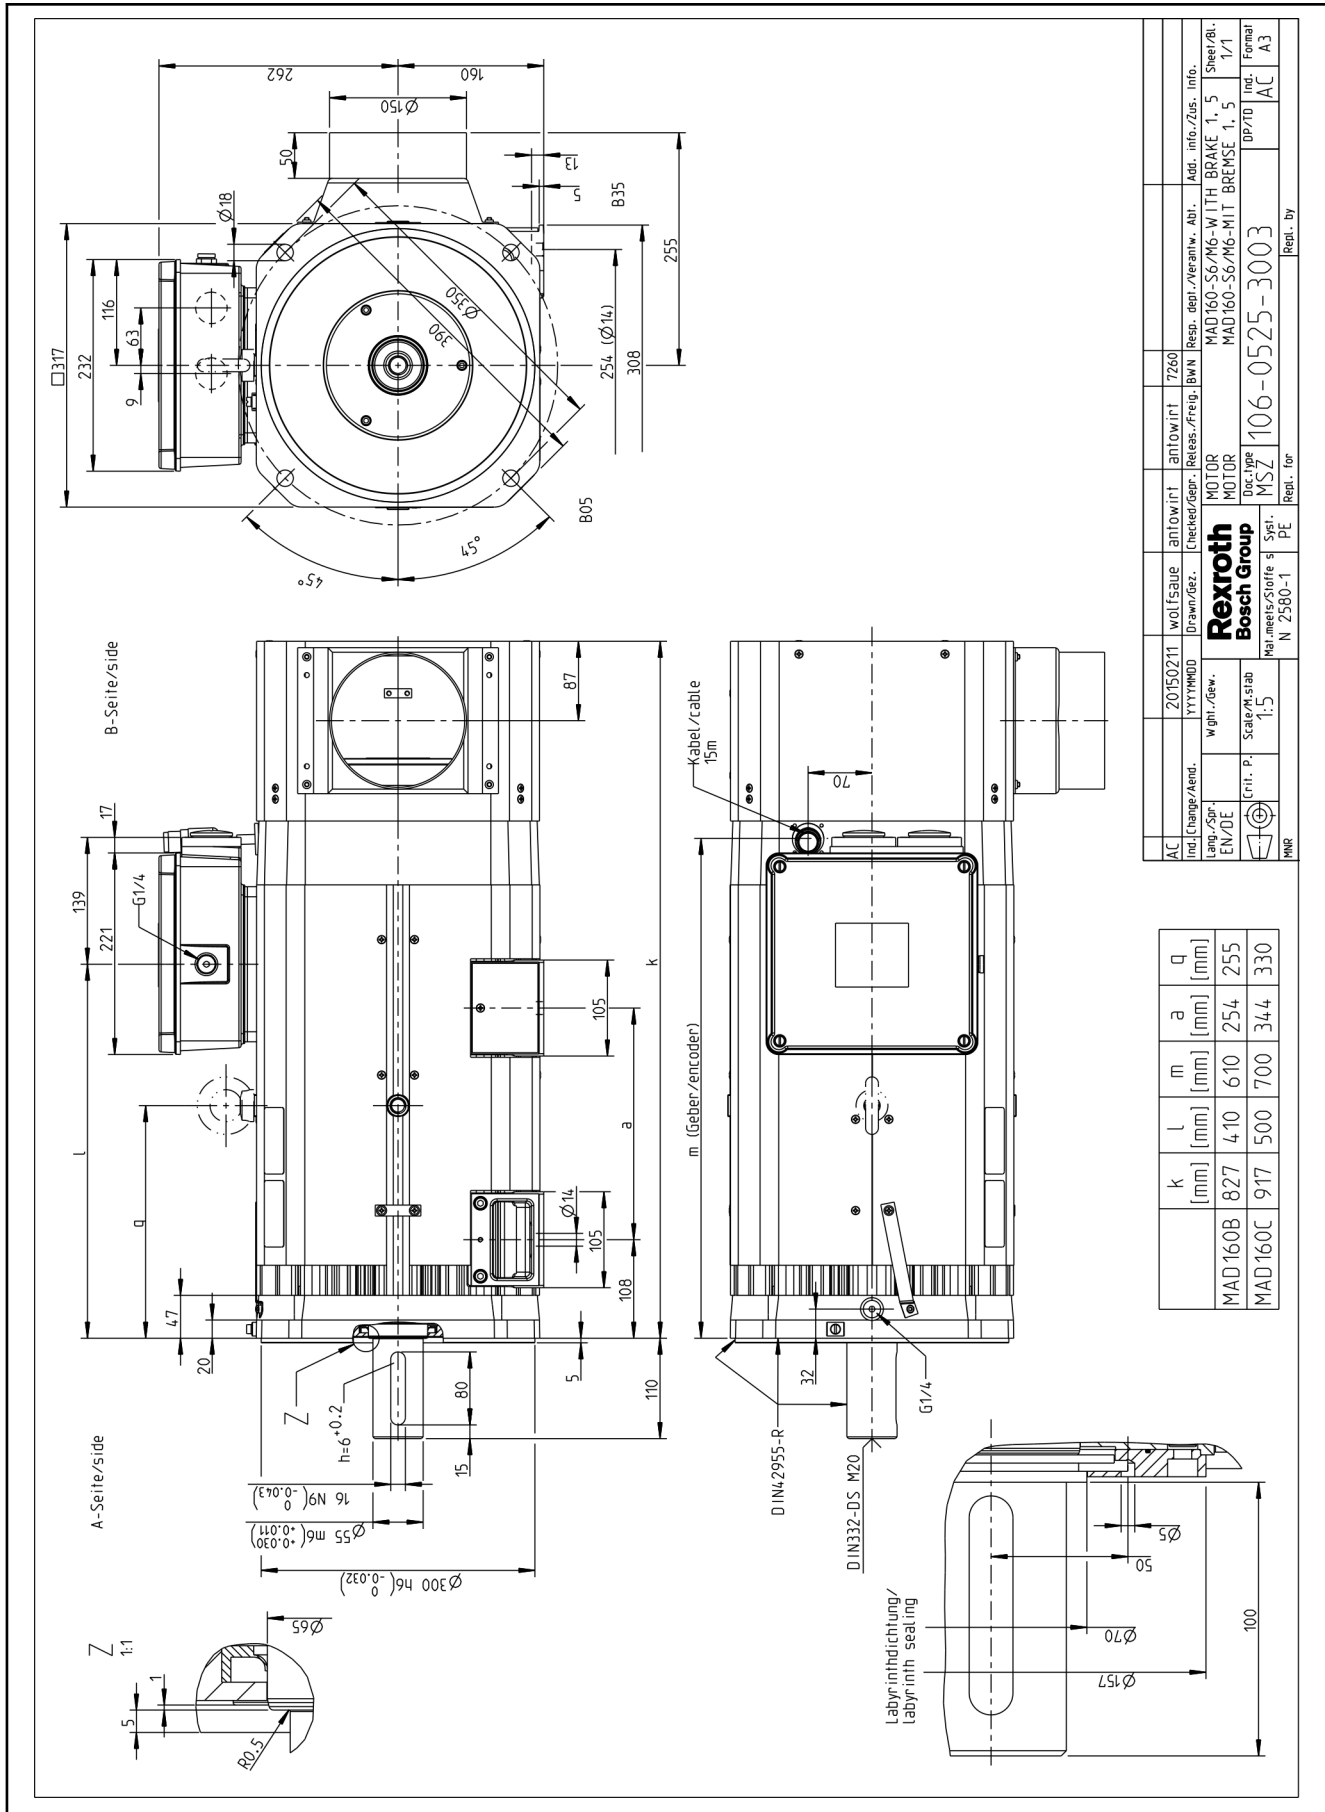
MAD160 with M6/S6 encoder, brake 1/5
